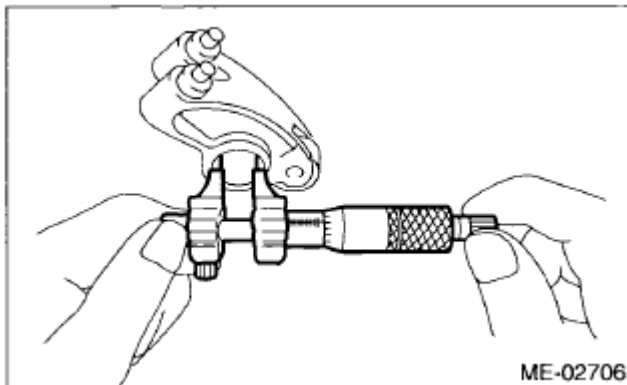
Measuring Inner Diameter Of Valve Rocker Arm
